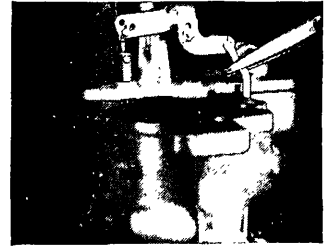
Bend throttle connector rod at lower end to give specified pump plunger travel. (This adjustment only for carburetors with specified pump stroke.) Do not bend throttle connector rod at position shown by pliers. Bend at lower angle for adjustment
